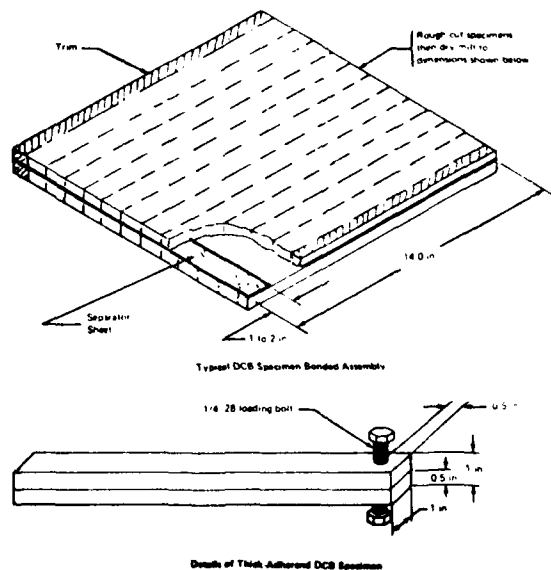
Thick Adherend Double Cantilever Beam (DCB) Crack Extension Specimen (from AFML-TR-76-173).
